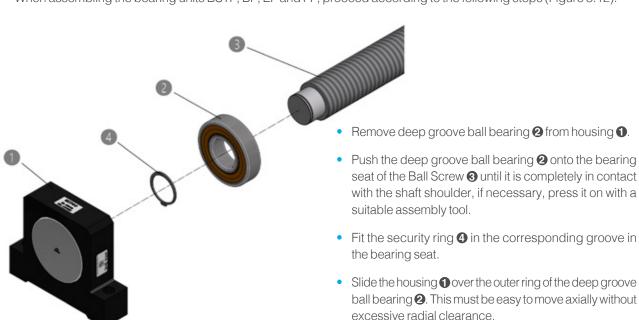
Assembly of floating bearing units type BSTF, BF, EF and FF
